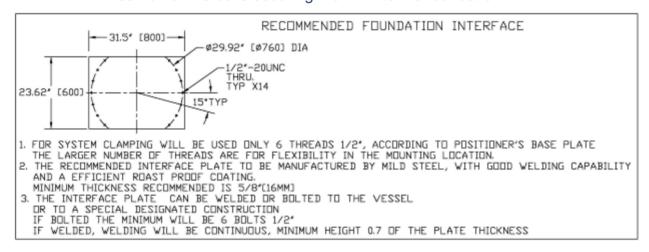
Recommended Mounting Surface (Foundation) Layout
